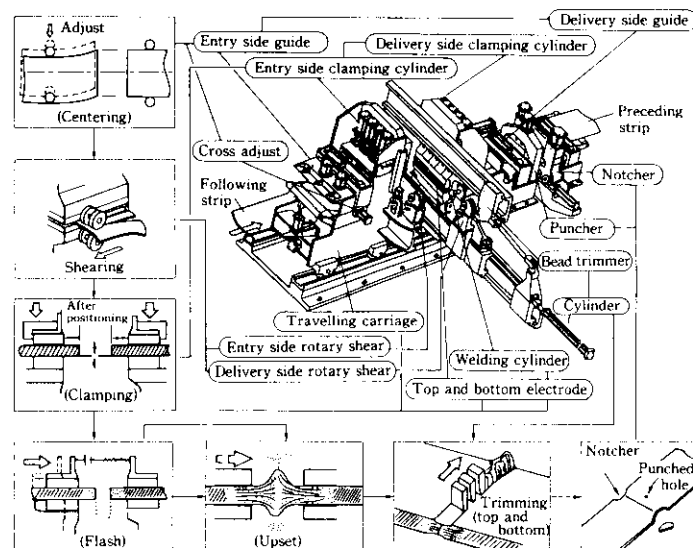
Overview of flash butt welder (FBW) and schematic diagram of welding process flow
